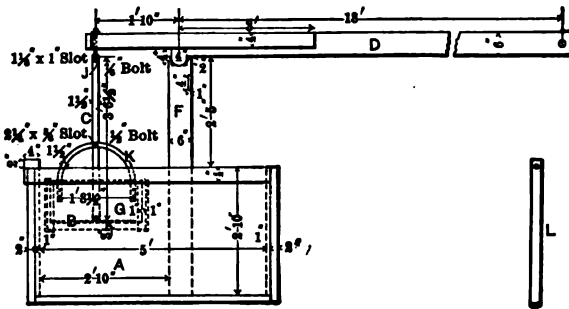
SIDE ELEVATION OF HAND JIG AT MILL 2.
